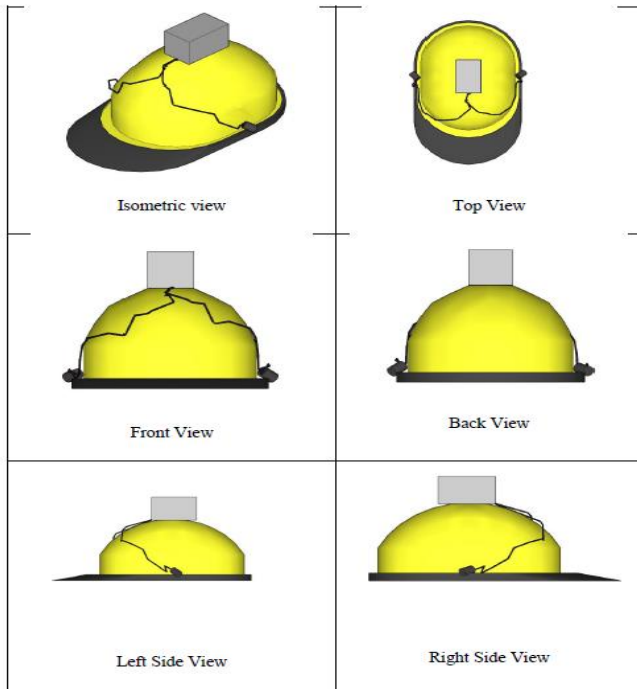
3D Drawing of Smart Motorcyclist Helmet
